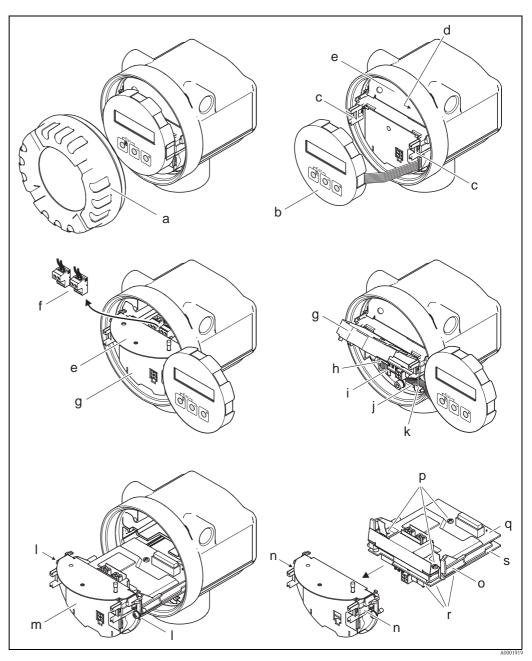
Installing and removing electronics boards Non-Ex, Ex-i and Ex-n version
